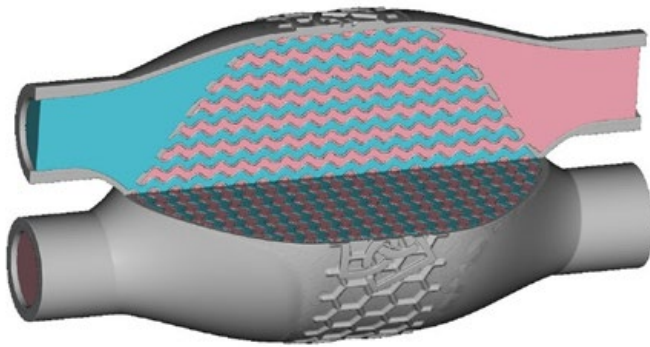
Section view of completed heat exchanger, including hot and cold fluid zones (left), and the printed part showing minimal support material requirements (right).
